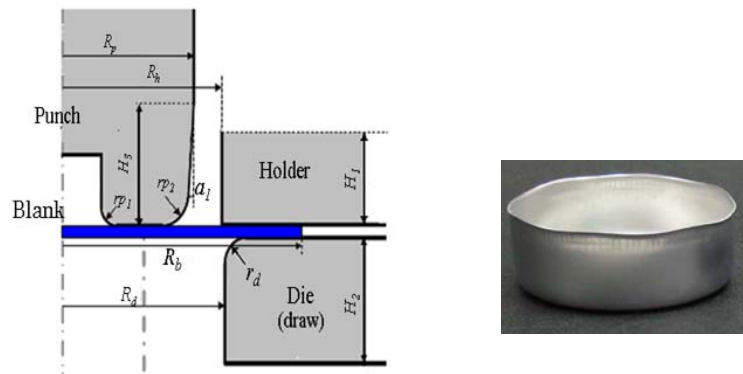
Tools and their dimensions for the circular cup drawing [5]
